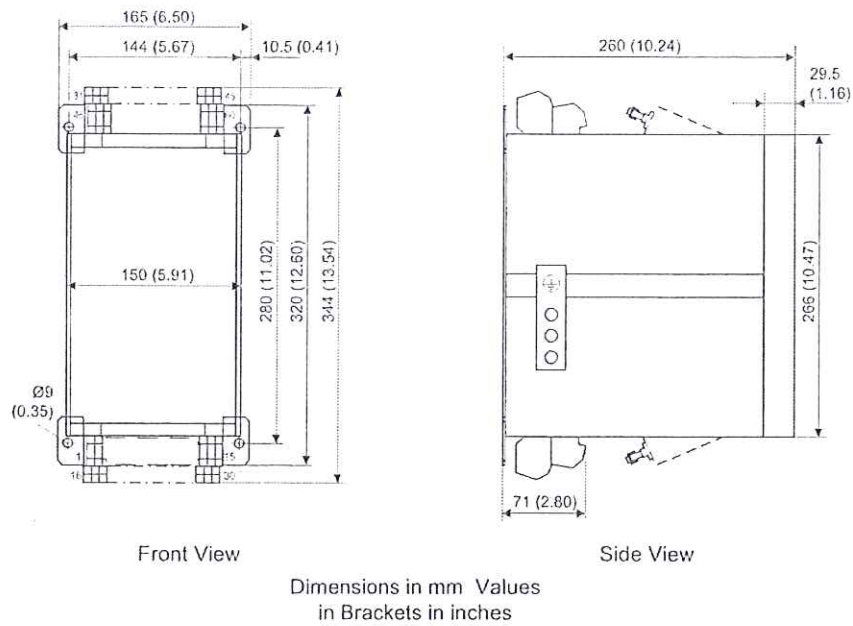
Dimensional drawing of a 7SJ61 for panel flush mounting (housing size $\frac{1}{3}$)
